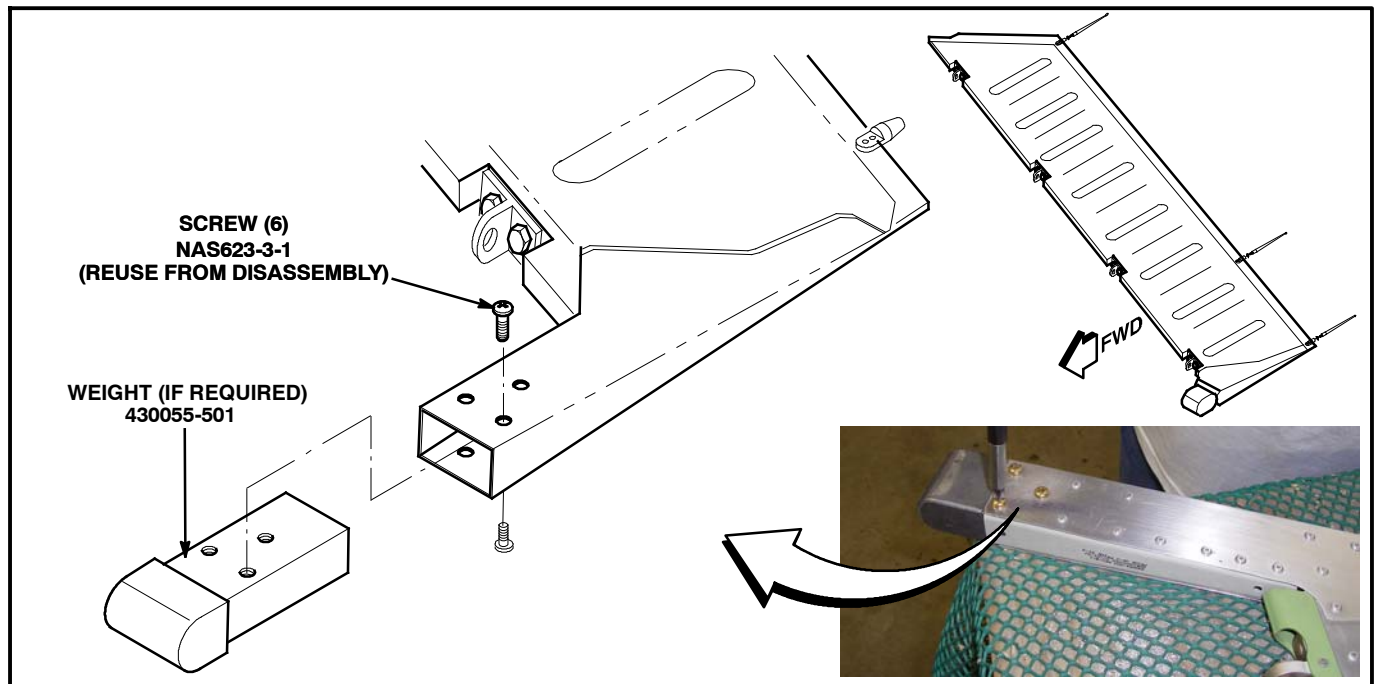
ELEVATOR ADDED WEIGHT INSTALLATION
